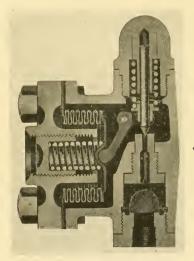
SECTIONAL VIEW OF AMERICAN AUTOMATIC EXPANSION VALVE.
